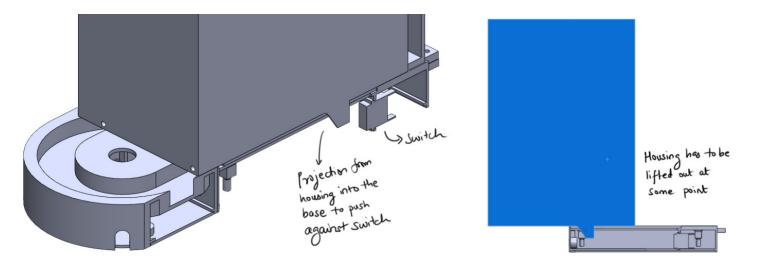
Example of how the switch trigger could look and its impact on the method of taking the housing out
